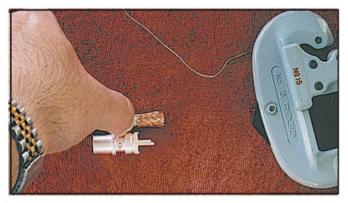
Again, my thumb indicates where to cut. The shield and center insulator will be cut so that the cable will fit into the connector body, and stop where the Teflon insulator joins the connector body.
